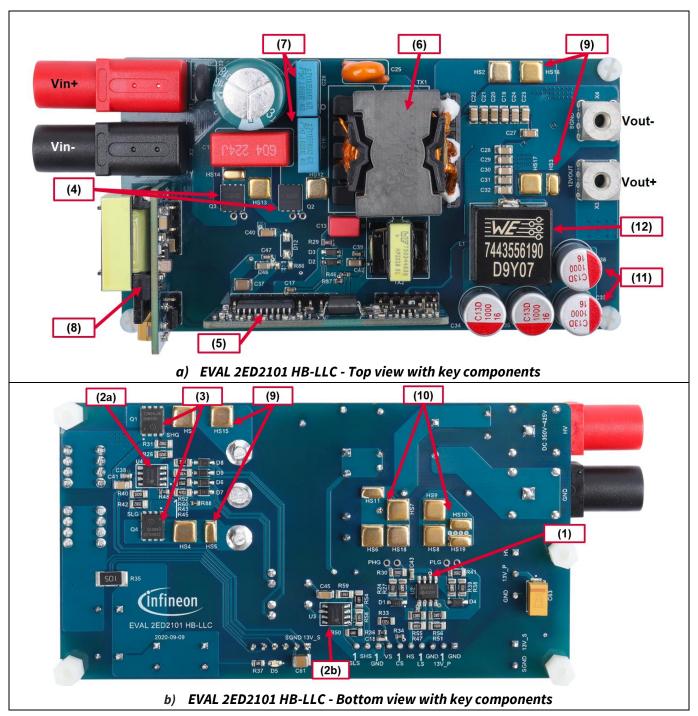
EVAL 2ED2101 HB-LLC - PCB board views
